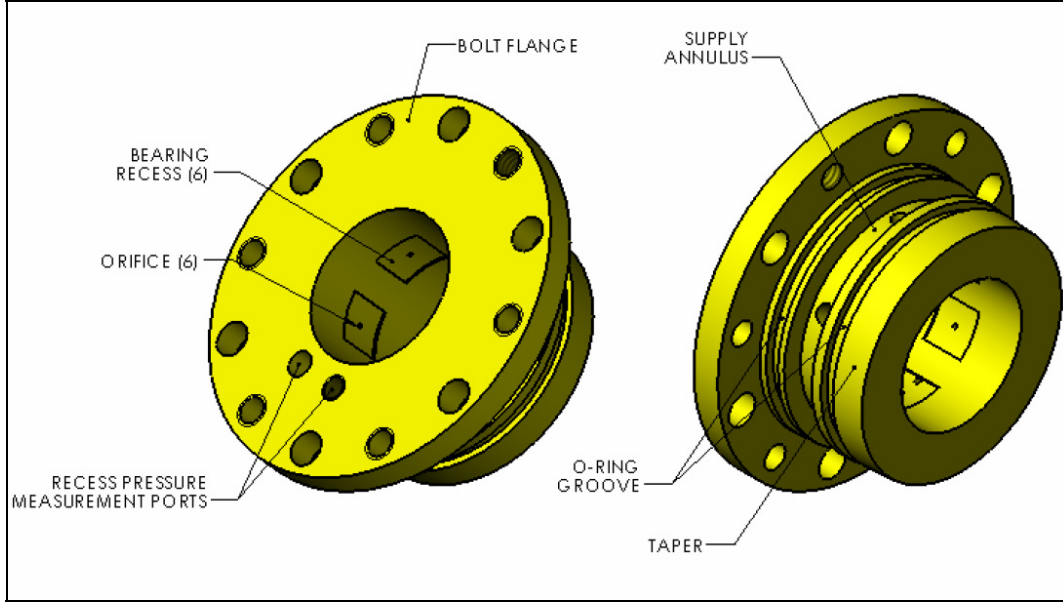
Hybrid bearing geometry by Pavelek [6]
